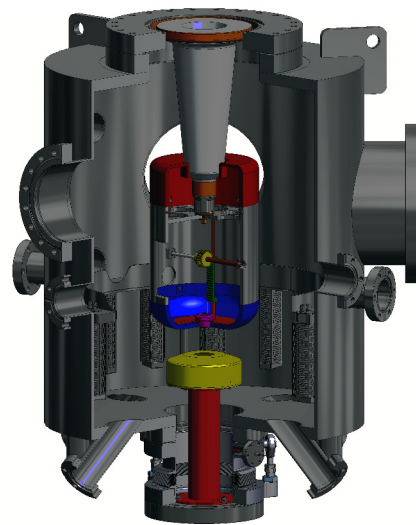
Technical drawing of the 200 keV photo source STEAM.
